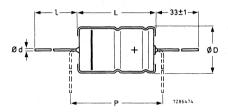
Style 1; see Table 1a for dimensions d, D, L, I and P.
